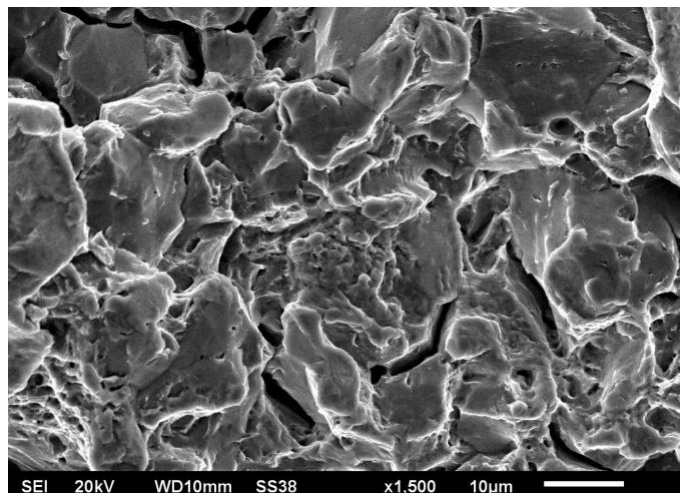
Displays the fracture surface at the drill bit failure point, highlighting visible microcracks (mag. 1500x)
